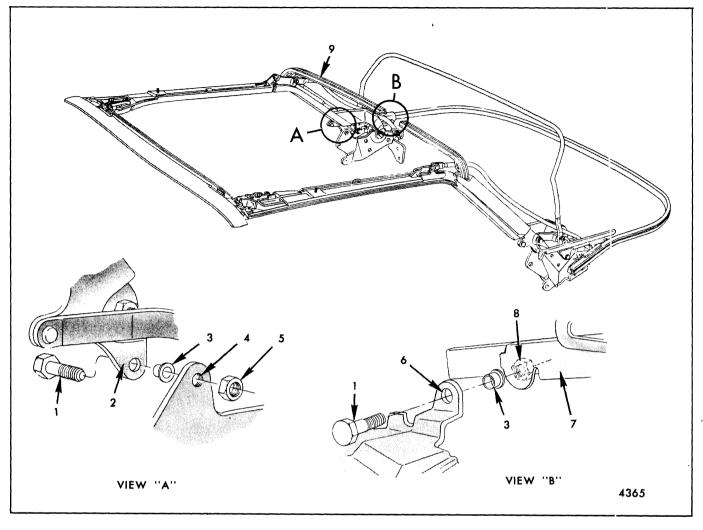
Center Bow Assembly and Rear Trimstrick Attachment
